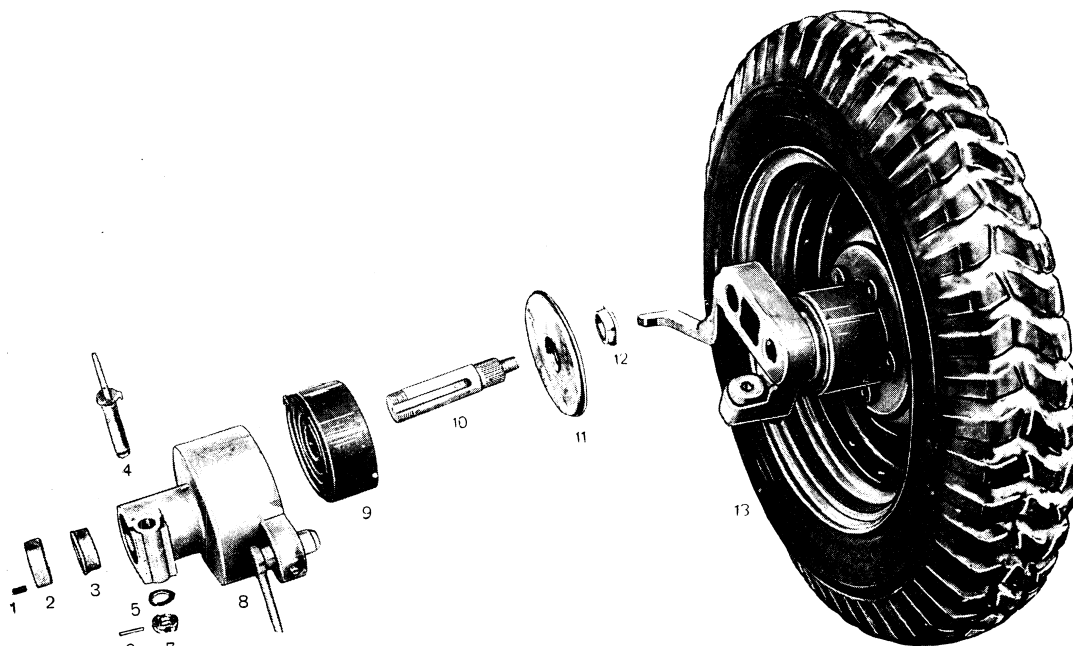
SPRING DEVICE WITH COIL SPRING — DISMANTLED (for weapons B1 and B1A1)
